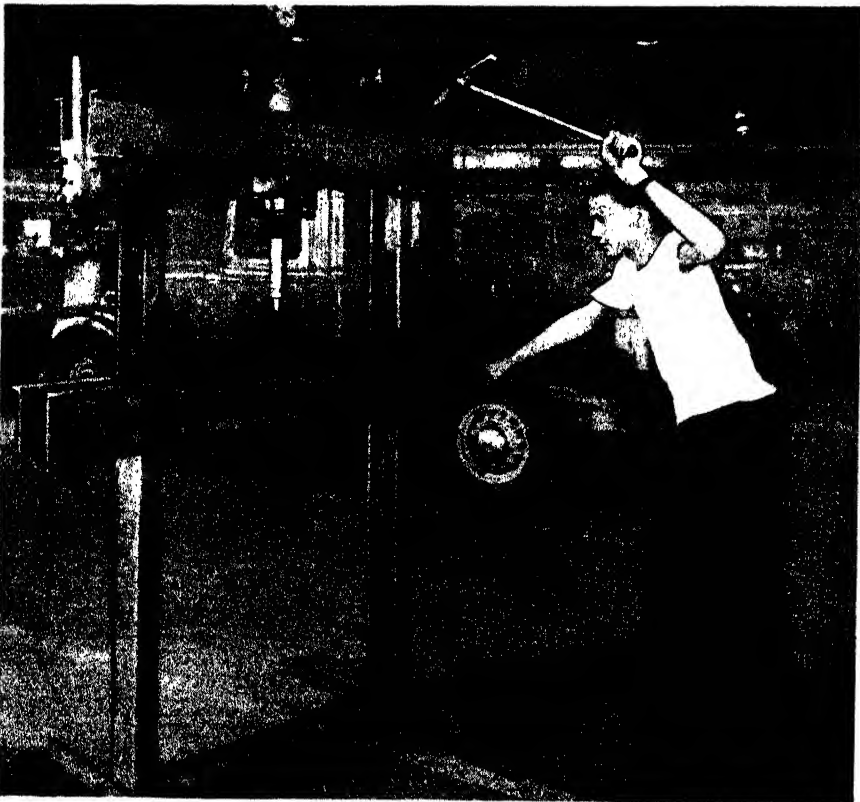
HYDRAULIC PRESS FOR STRAIGHTENING AUTOMOBILE AXLES
